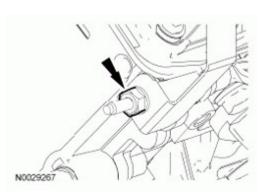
Locating Oil Level Indicator Tube Bracket Bolt Courtesy of FORD MOTOR CO.
